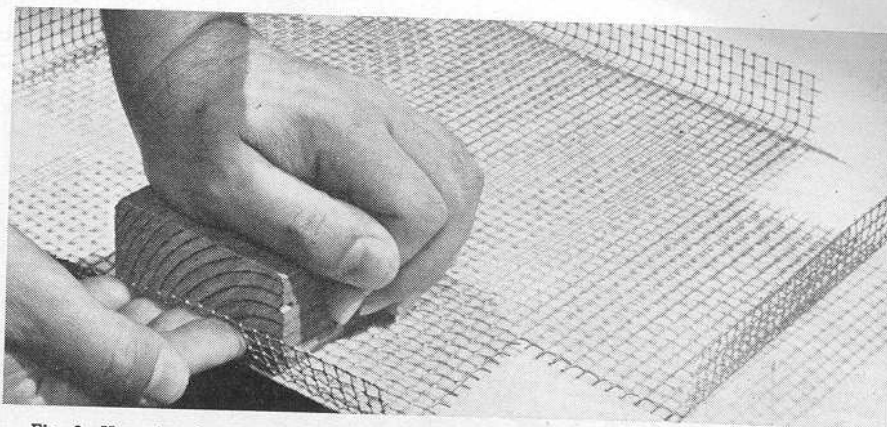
How the chassis flange can be formed by hand by bending the material against a wooden block. If unusually heavy components are to be mounted on a "basket chassis" stiffeners, in the form of additional pieces of the hardware cloth, may be fixed to the chassis by working the wire stubs into the chassis surface. These structures could also be used to form shielded compartments within the chassis proper.
